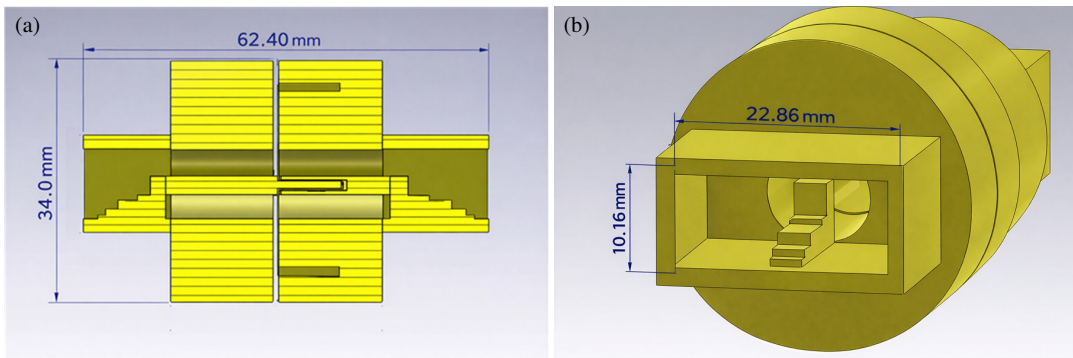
RF rotary joint mechanical and electromagnetic design dimensions. All dimensions are given in millimeters. (a) Cross-sectional side view of the rotary joint illustrating the internal RF transmission path and choke structures. (b) Diagonal view of the rotary joint highlighting the external geometry and waveguide interface.
